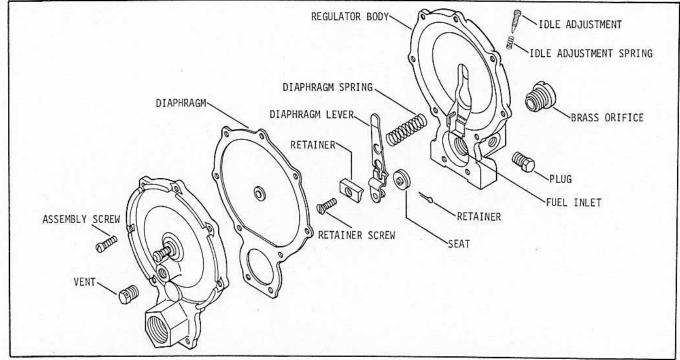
DISASSEMBLY MODEL F OR F1 REGULATOR
